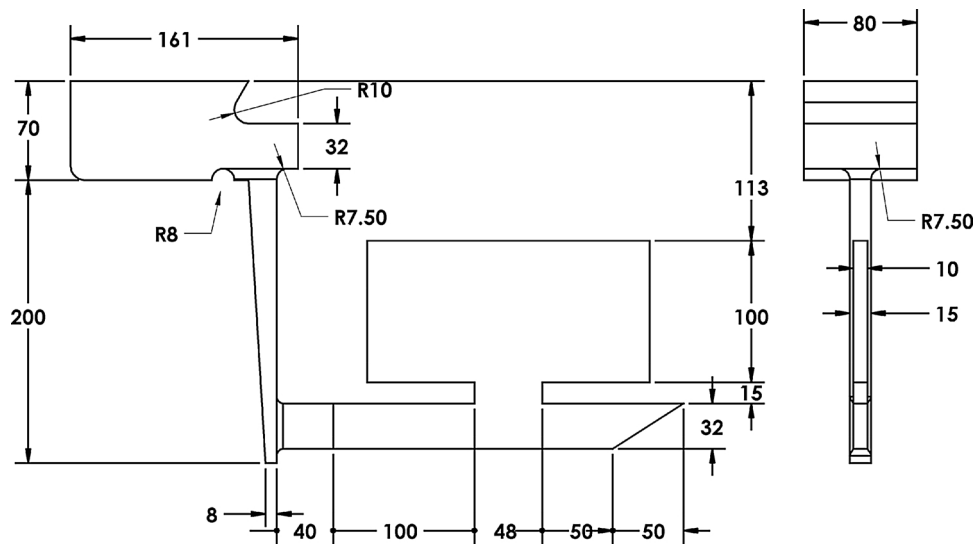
Dimensions of the pouring basin, runner, ingate and cast part are constant for all sprue designs.
